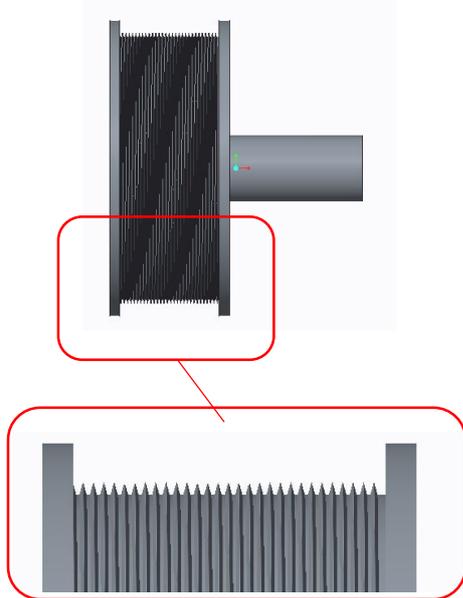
Diagram showing a zoomed in section of the coiled cable mechanism.
